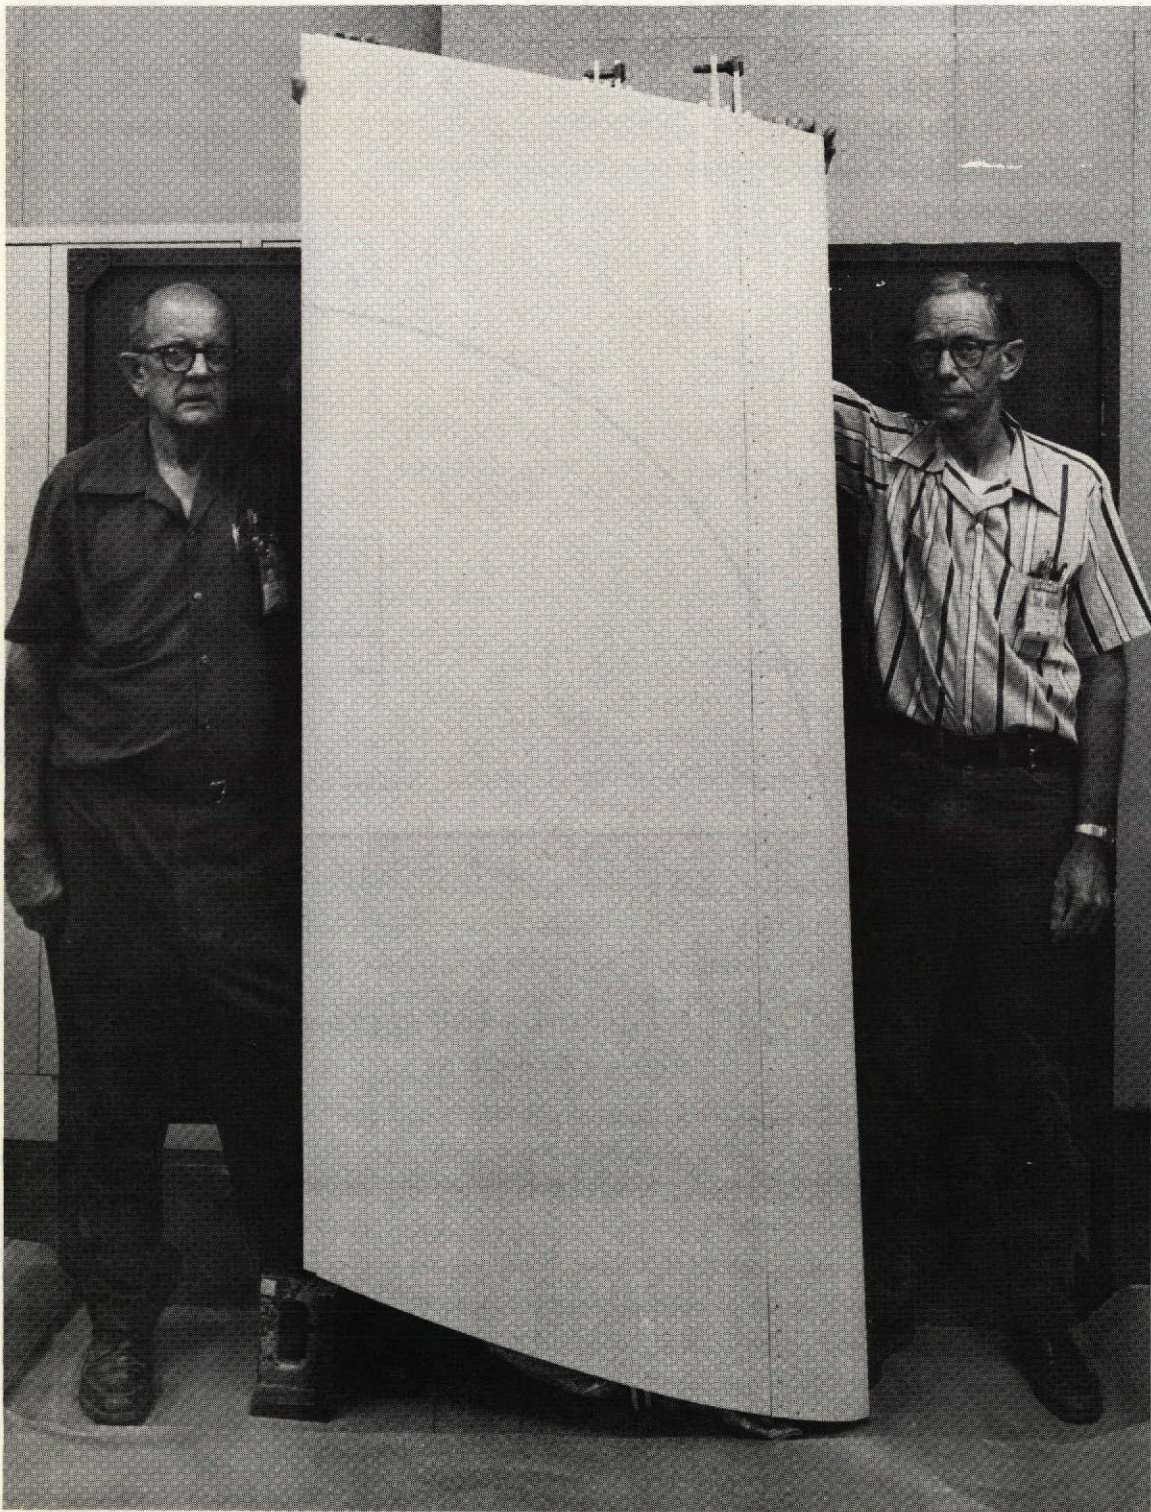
COMPLETED FLAP ASSEMBLY
